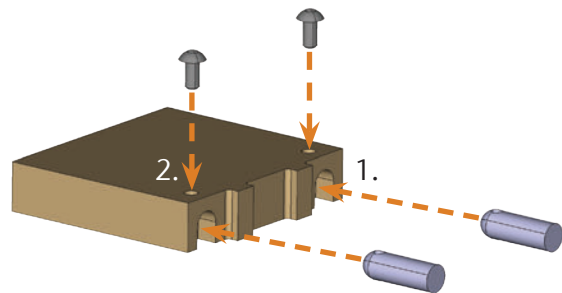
INSERTING PINS AND SCREWING THEM IN TIGHTLY
